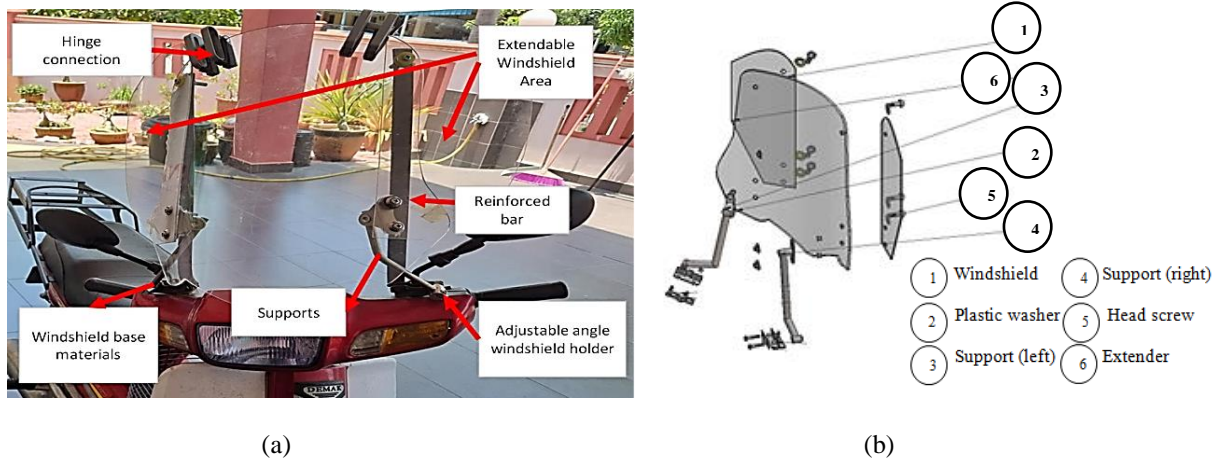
Windshield components: (a) physical/fabricated and (b) schematic
